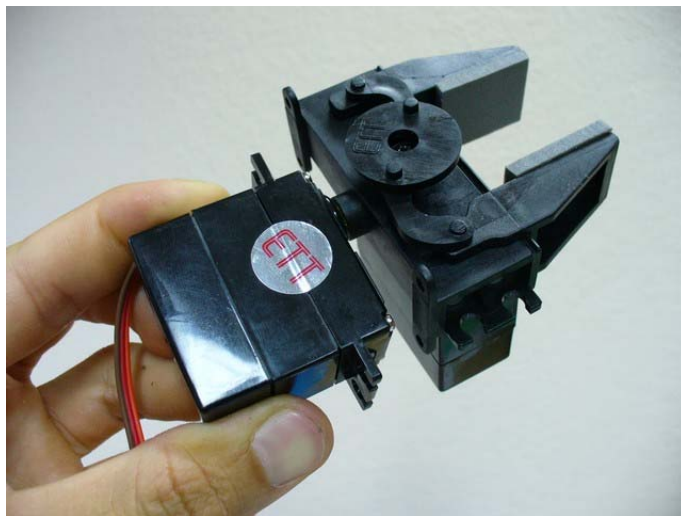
The servo motor #6 that used to open/close the gripper is installed
